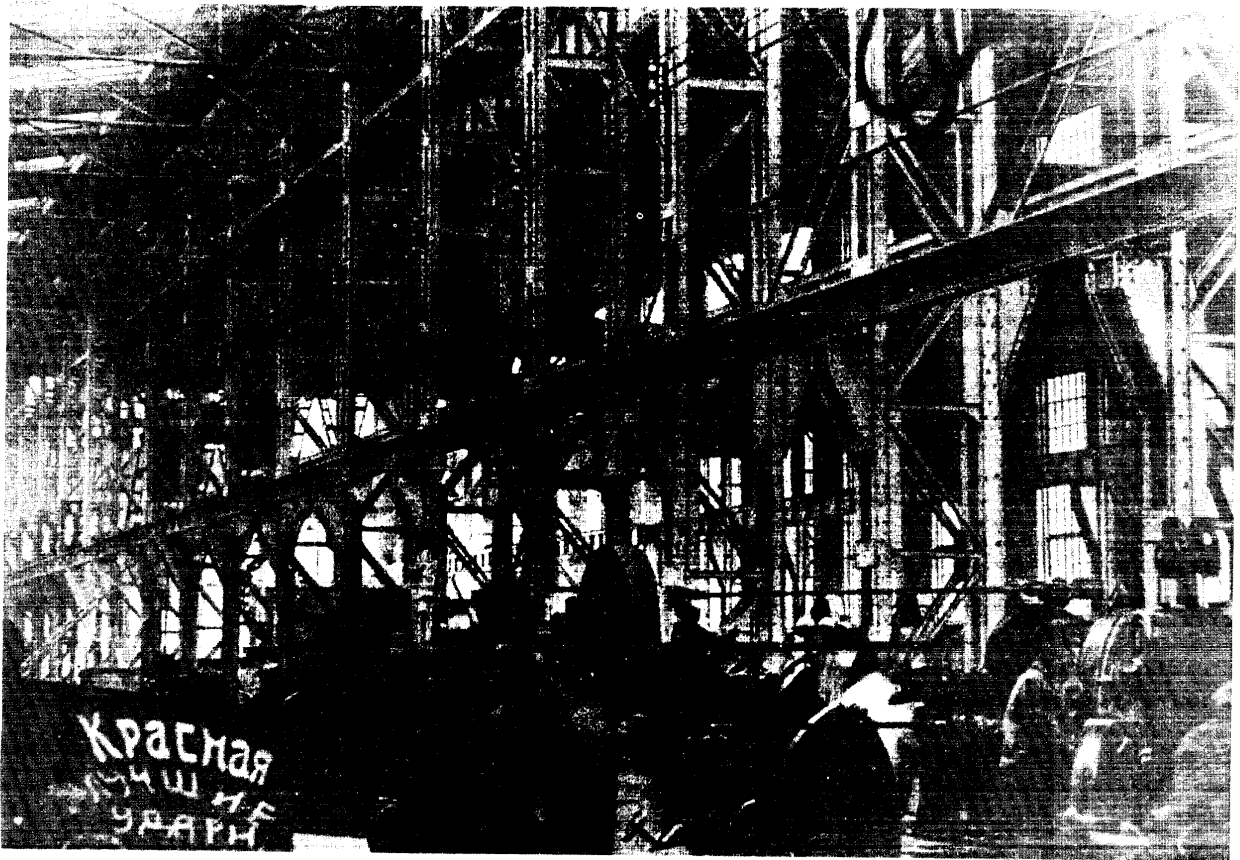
Heavy machinery plant, Kramatorsky. 1931 or earlier.
